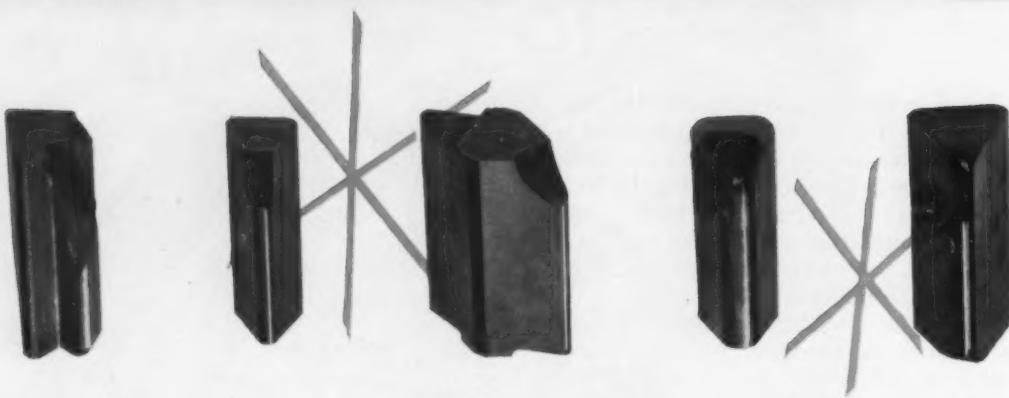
Not many decisions in selecting the proper tool-holder are as clear-cut as this one. Here, throw-aways would not be heavy enough to do the job. Brazed tools—or on-end inserts, in some cases—would be used for turning this heavy forging.
